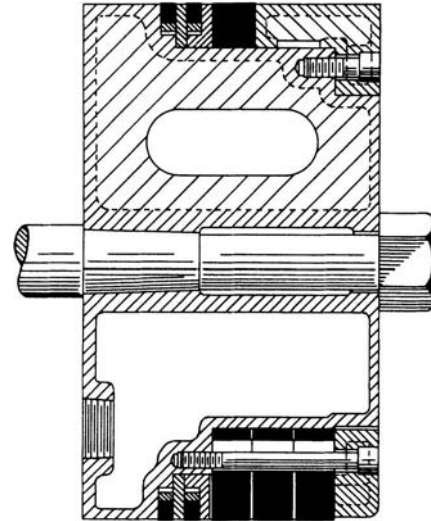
Piston equipped with carbon piston and wearing rings for a non-lubricated cylinder.
